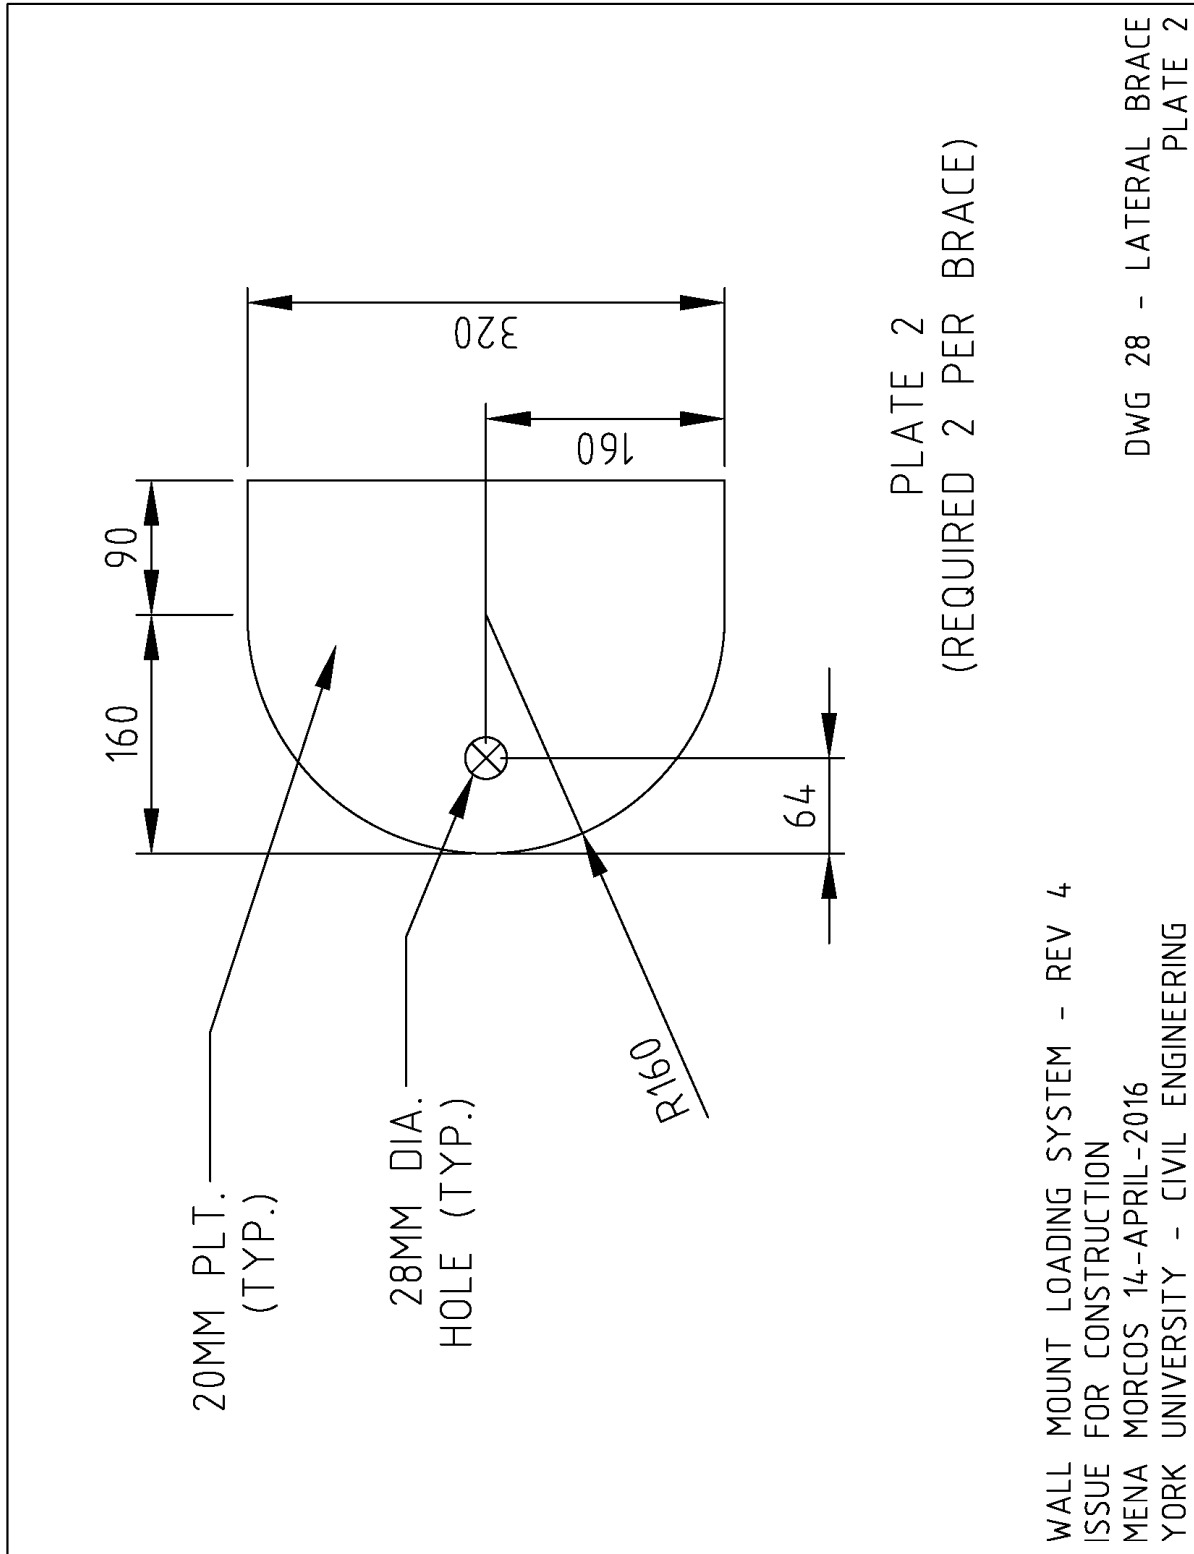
Wall mount loading system design and fabrication drawing – Drawing 28.
